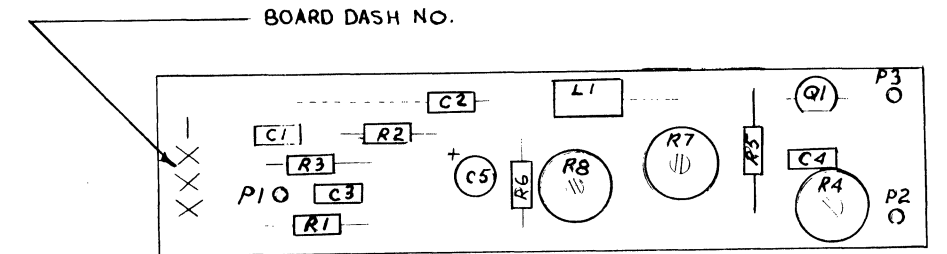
Direct Equalizer Board Parts Location (837031)
